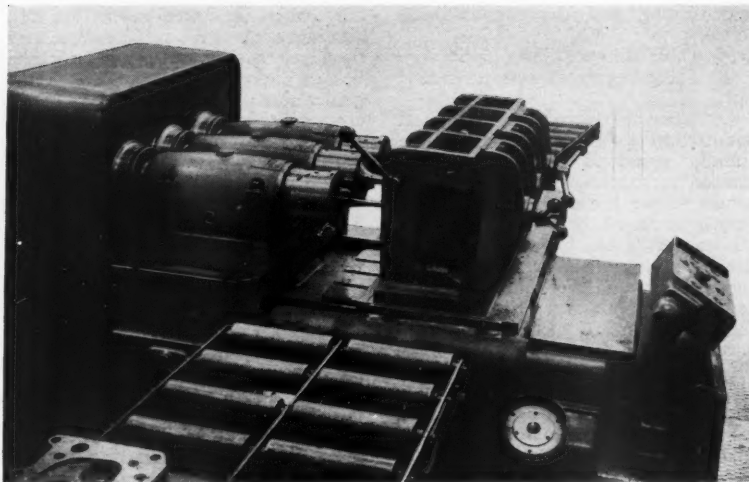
Precimax fine borer for finishing inlet valve guide holes and valve seats.
